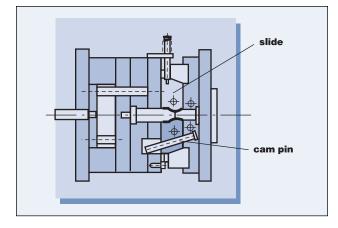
Cammed mold for part with undercut cams move in vertical direction when mold is opened.
